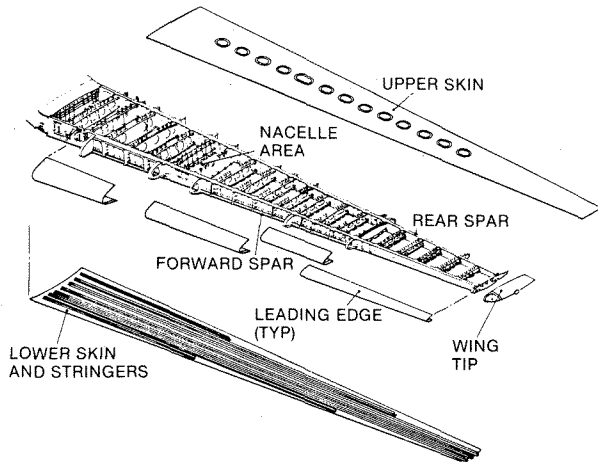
WING STRUCTURAL ARRANGEMENT
